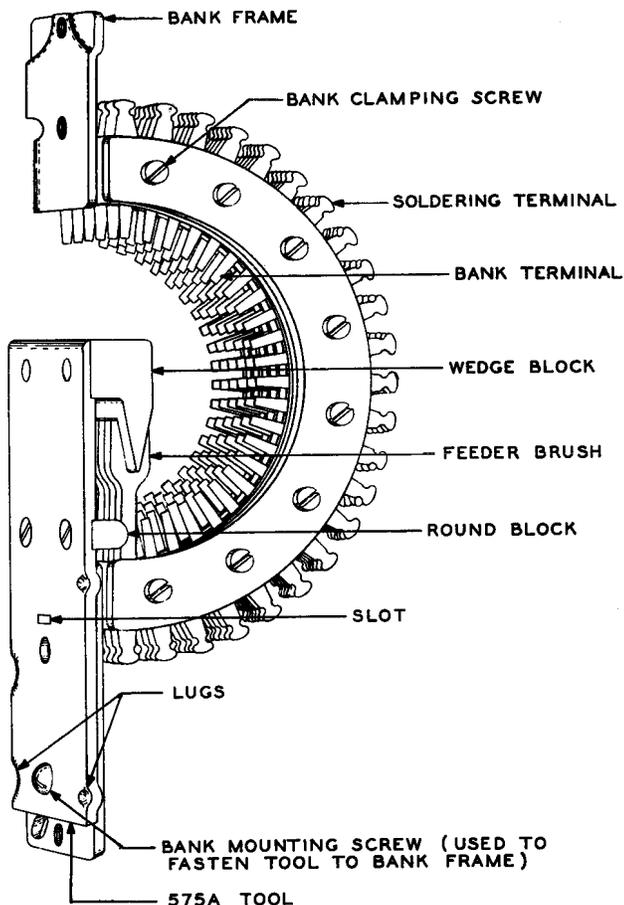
Feeder Brushes Aligned with 575A Tool
